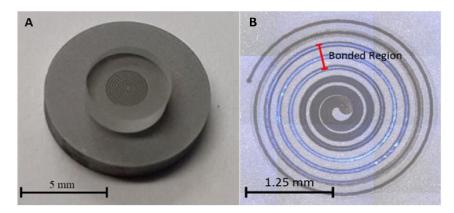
An image of a piece of YAG (top) welded to AlSi (bottom), and a brightfield microscope image of the weld spiral showing the region where the interafce is welded [3].
